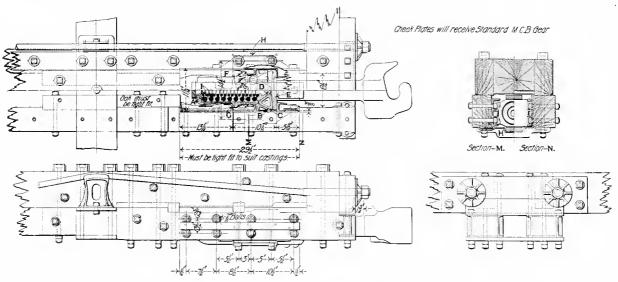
Westinghouse Friction Draft Gear. Steel Casting Attachment for Tenders, with Metal Sills. Westinghouse Air Brake Co. (252)
